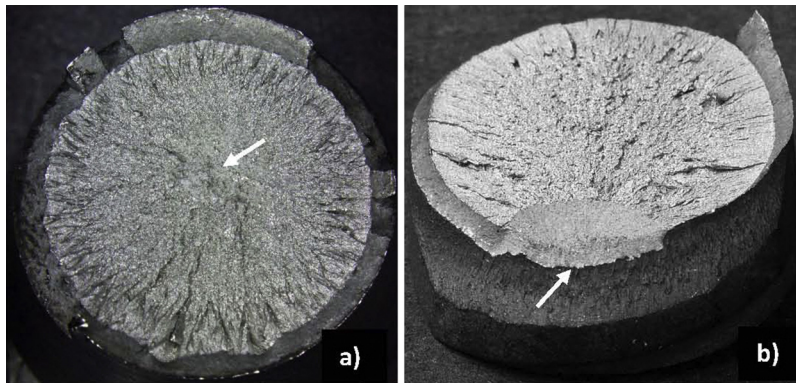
Appearance of fractures in the tensile specimens: (a) Machined tensile specimen. (b) Threaded bar sample. The white arrows indicate the initiation point of the fracture.
